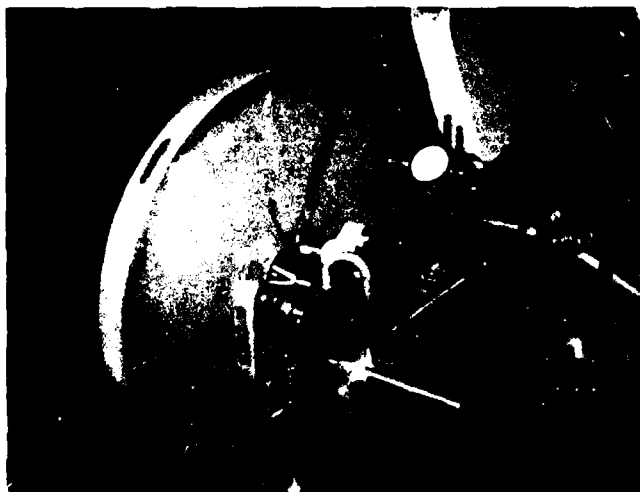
BALANCING FIXTURE ON FLYWHEEL
